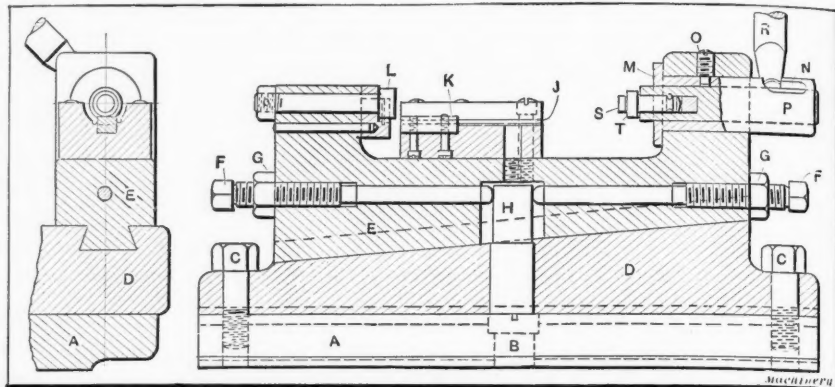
Fixture in which Part shown in Fig. 1 is milled
